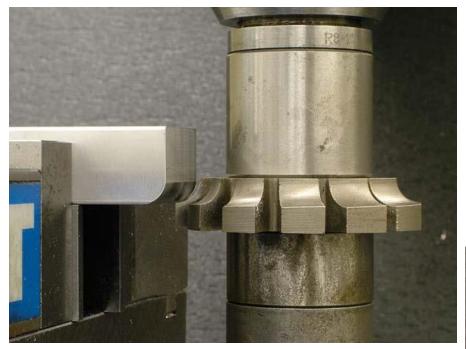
A radius on the bottom edge of a workpiece machined by a stub-arbormounted radius cutter. © Cengage Learning 2012
